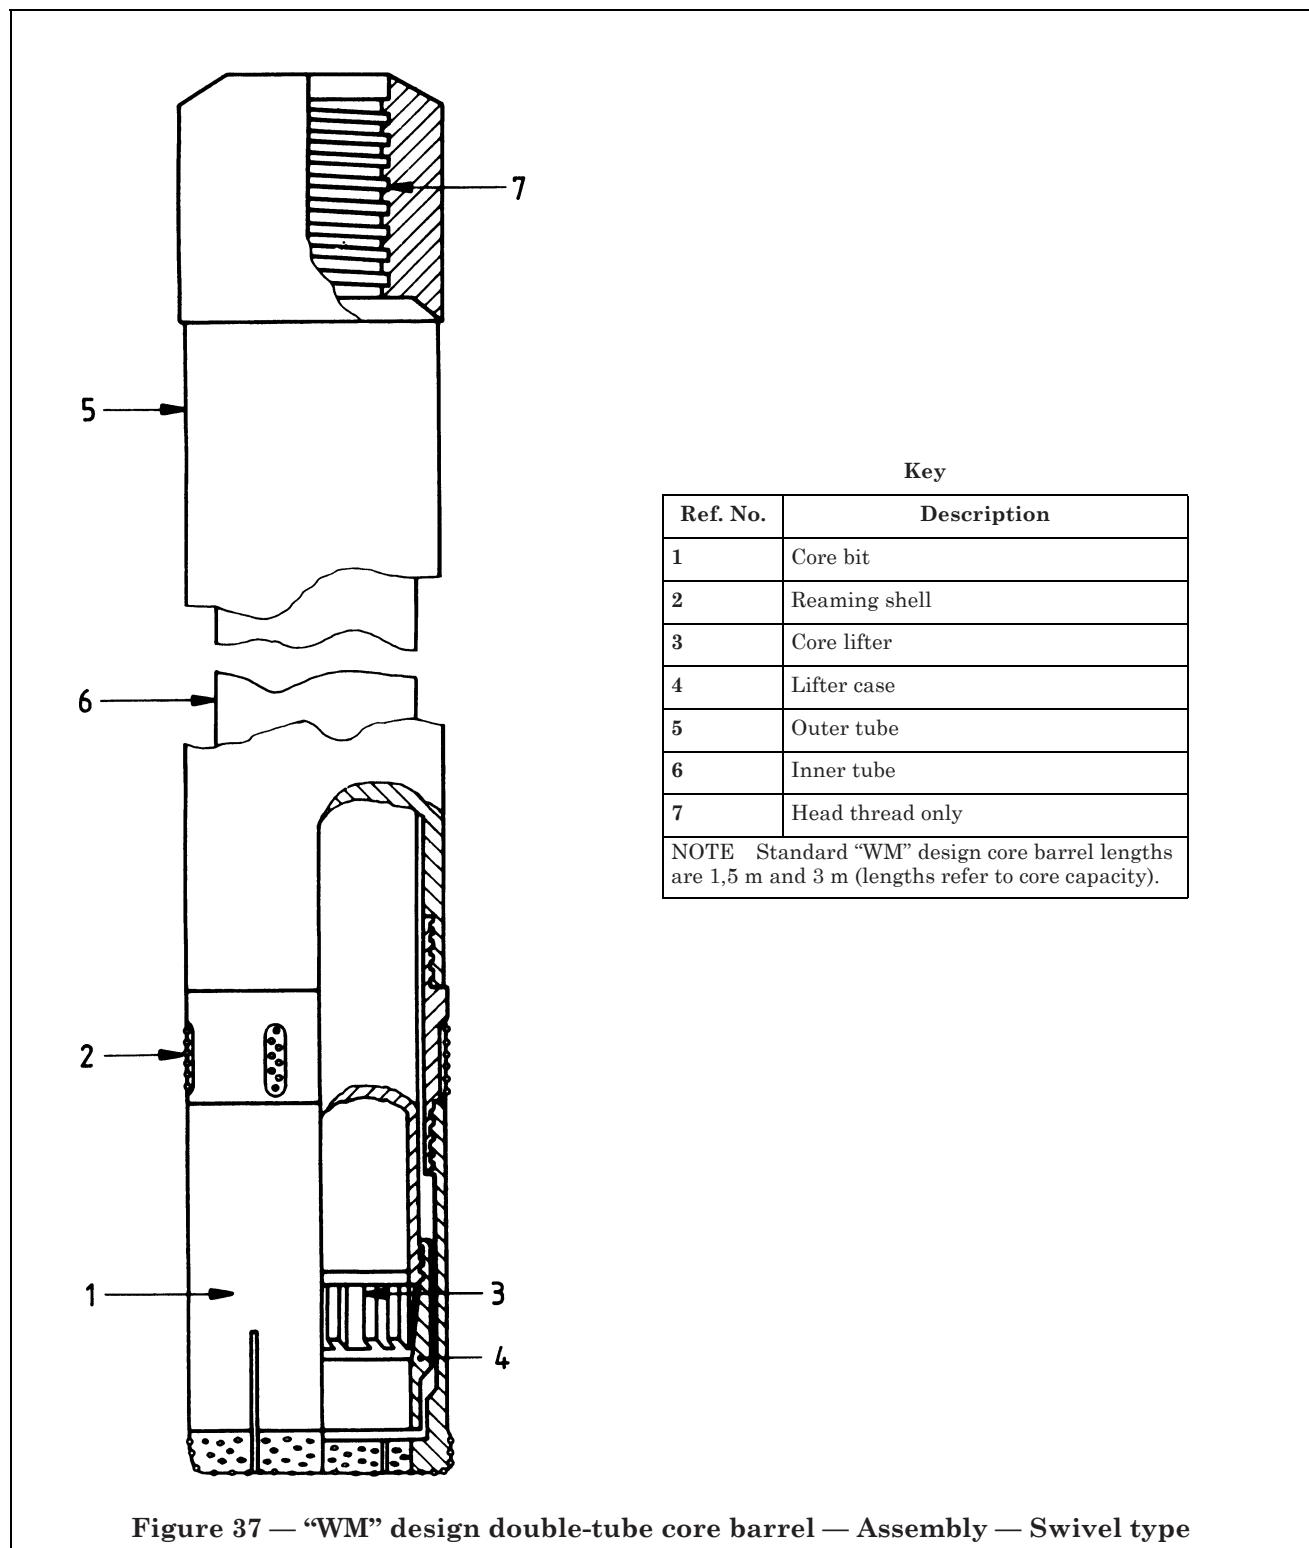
"WM" design double-tube core barrel — Assembly — Swivel type
